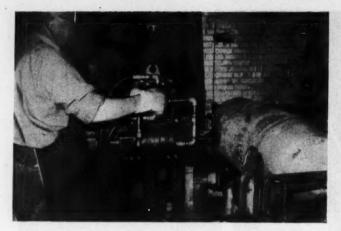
Testing Hangers with Hydraulic Pull-Testing Machine
